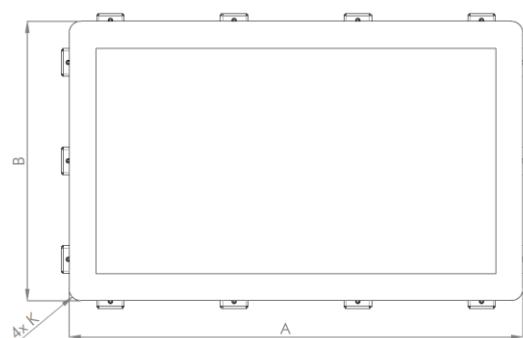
Dimensions Open Frame Cutout Front- and Spacerplate
